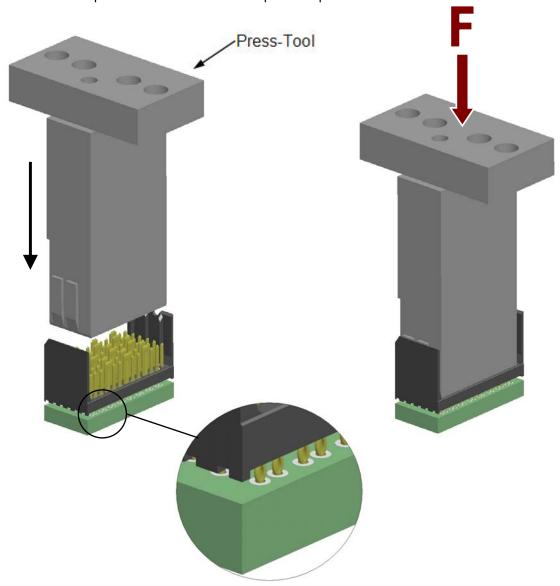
Module Placement and Press-Tool Alignment - Backplane Header
